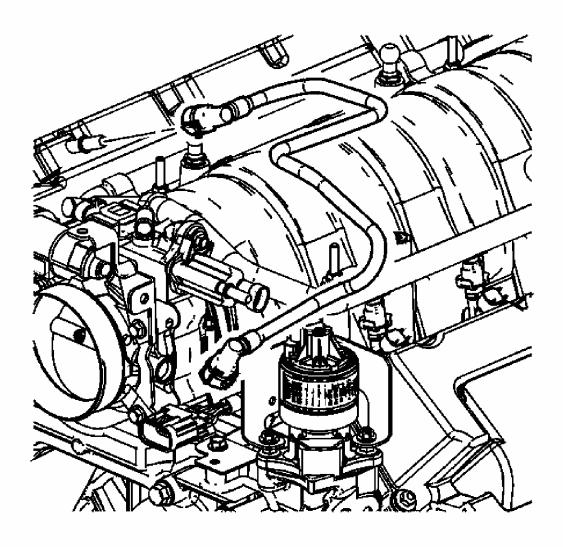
Identifying PCV Fresh Air Feed Tube Courtesy of GENERAL MOTORS CORP.
